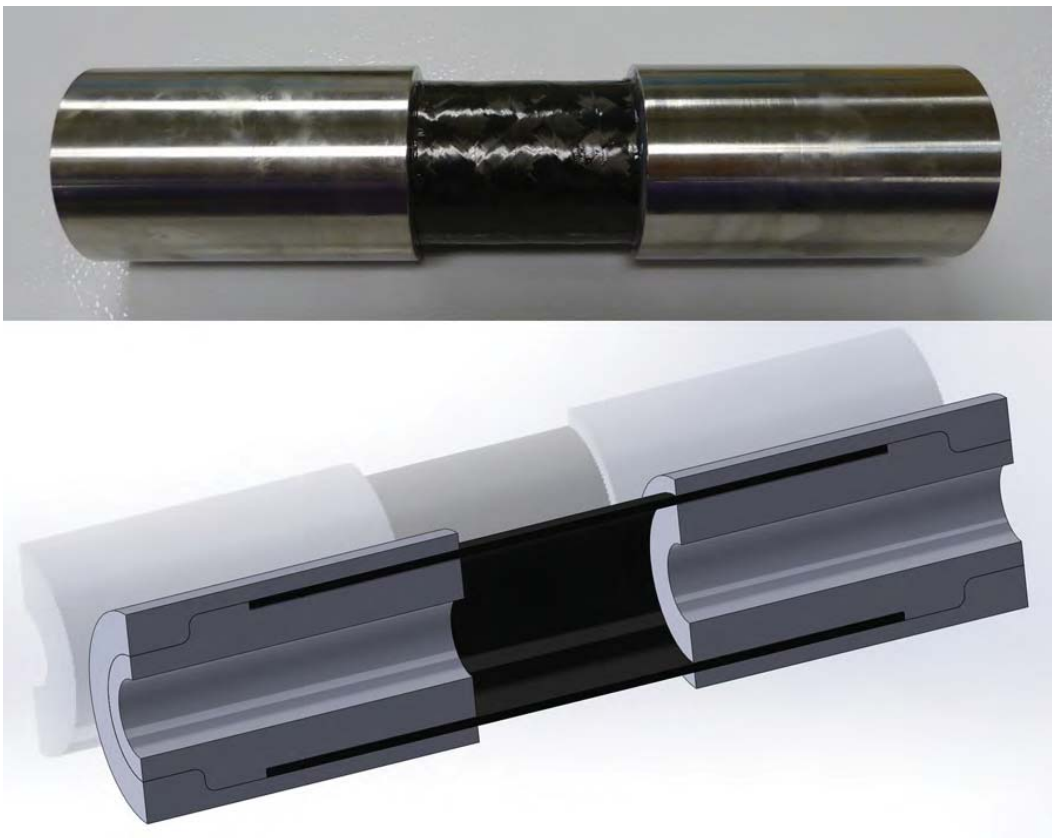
Finished tensile specimen (top) and section view of assembly (bottom).
